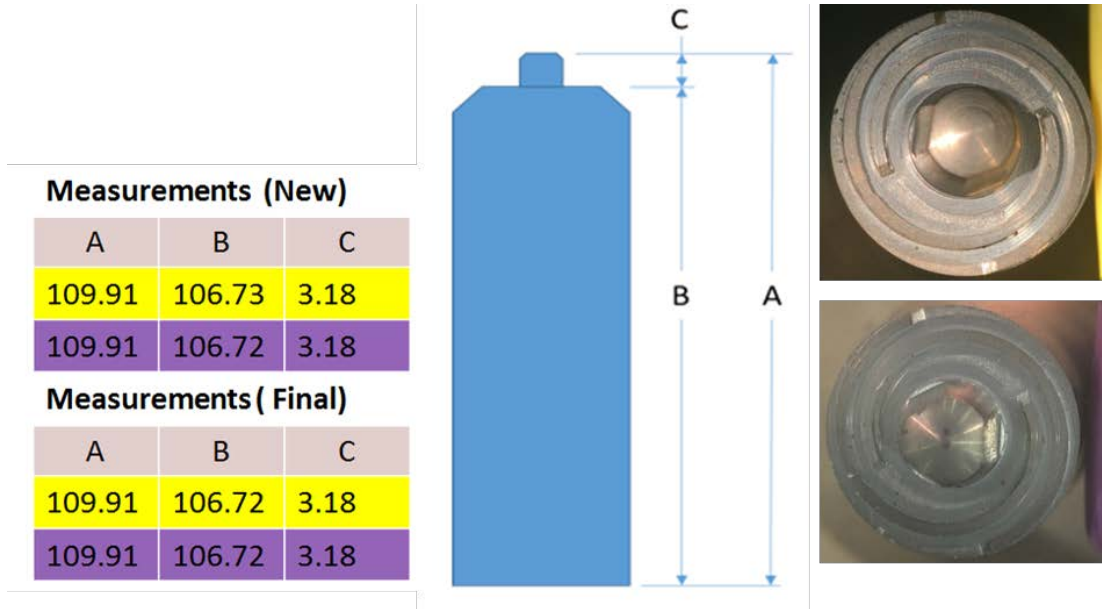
D.8. Tool pin length, measured in millimeters, before and after welding. The cleaned tools after 500 m of welding are shown to the right (Top - yellow, bottom - purple). Source: PNNL.
